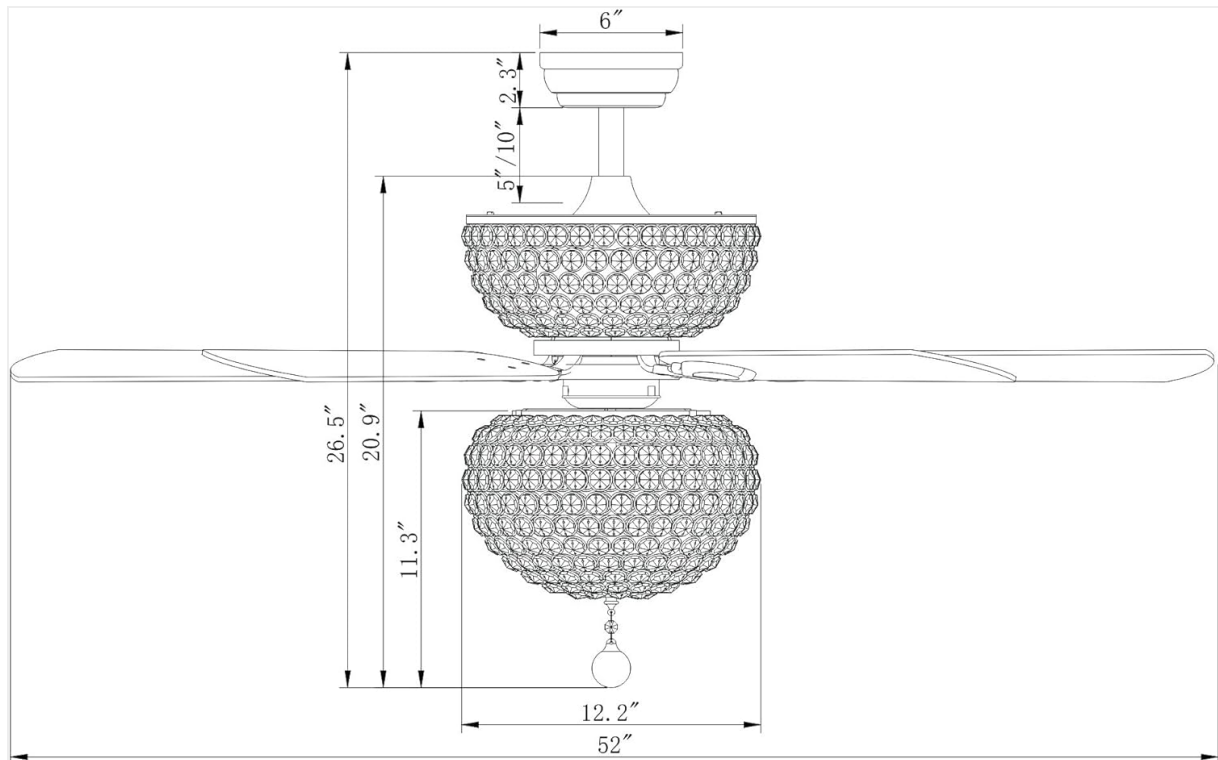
Dimensional drawing of the ceiling fan, indicating a 52-inch blade span and various height measurements.
